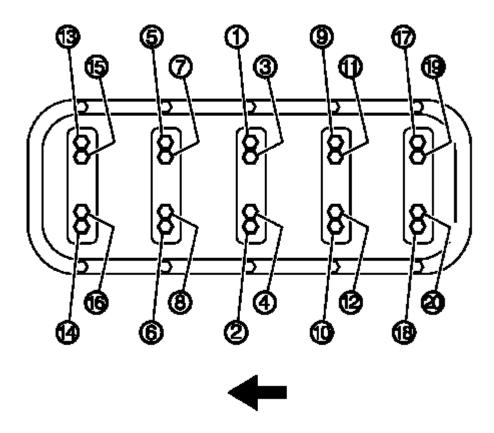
Lower Crankcase Courtesy of GENERAL MOTORS COMPANY
